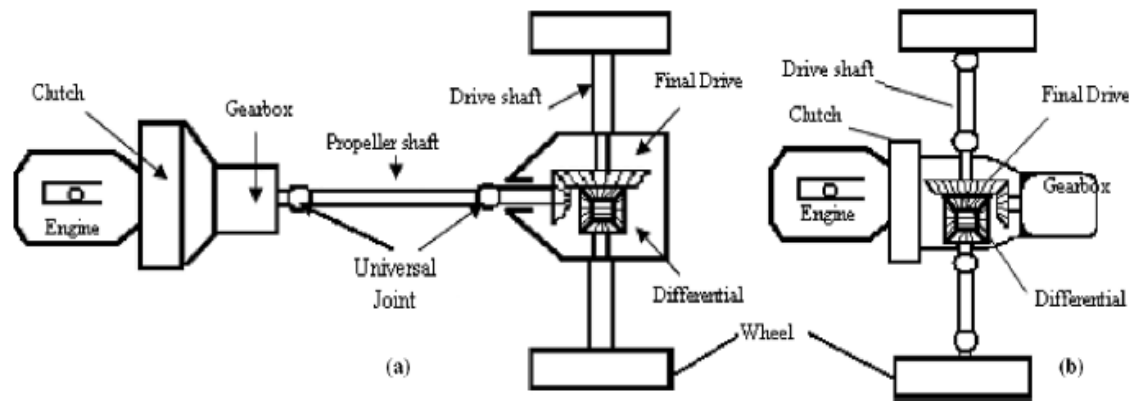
Elements of Power Transmission System (a) Rear Wheel Drive (b) Front Wheel Drive
